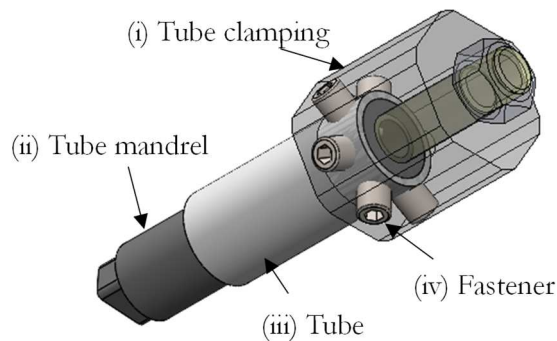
Rotational part: (i) tube clamping; (ii) tube mandrel; (iii) tube.
